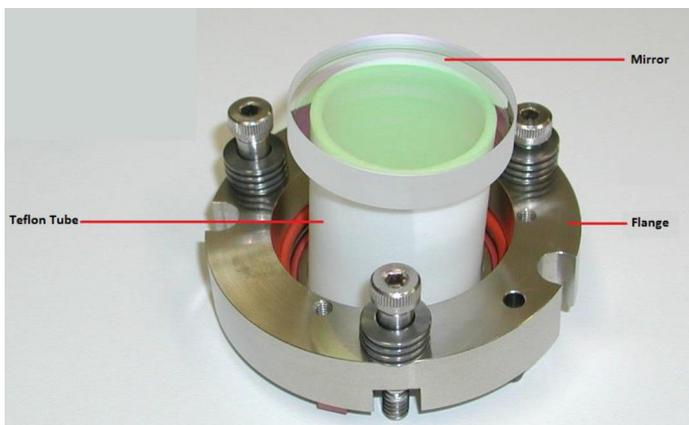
Mirror Flange Backing Ring Separated From Mirror Flange
